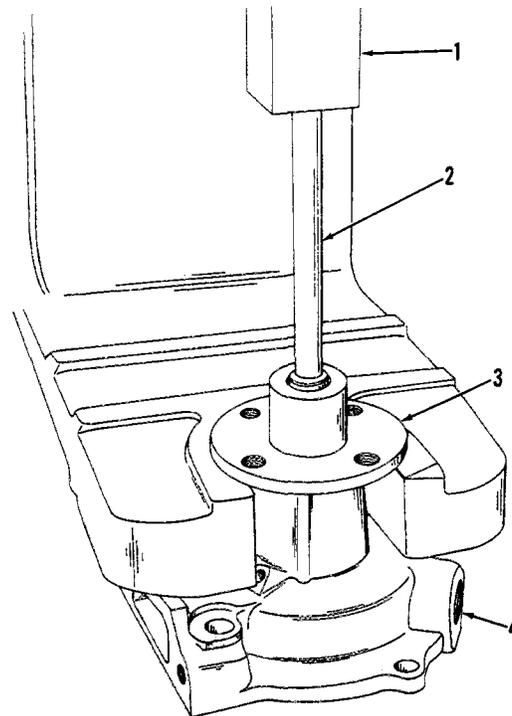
REMOVING WATER PUMP PULLEY HUB
